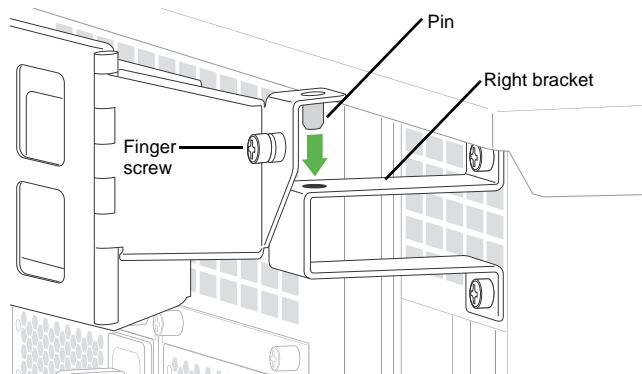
Attaching the Cable Arm to the Right Chassis-Attachment Bracket
